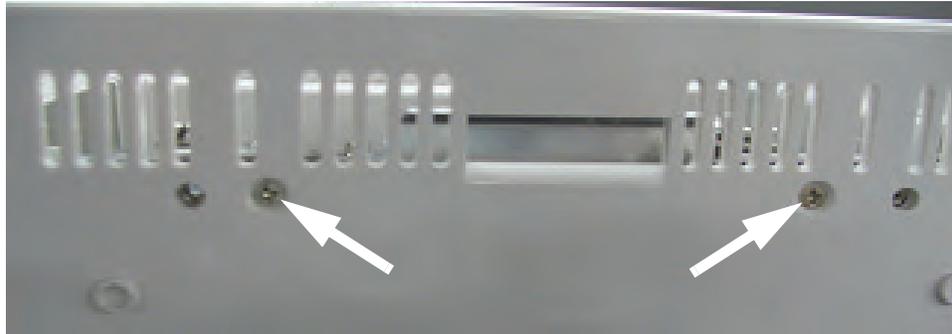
Remove the main frame and multi-parameter board assembly
